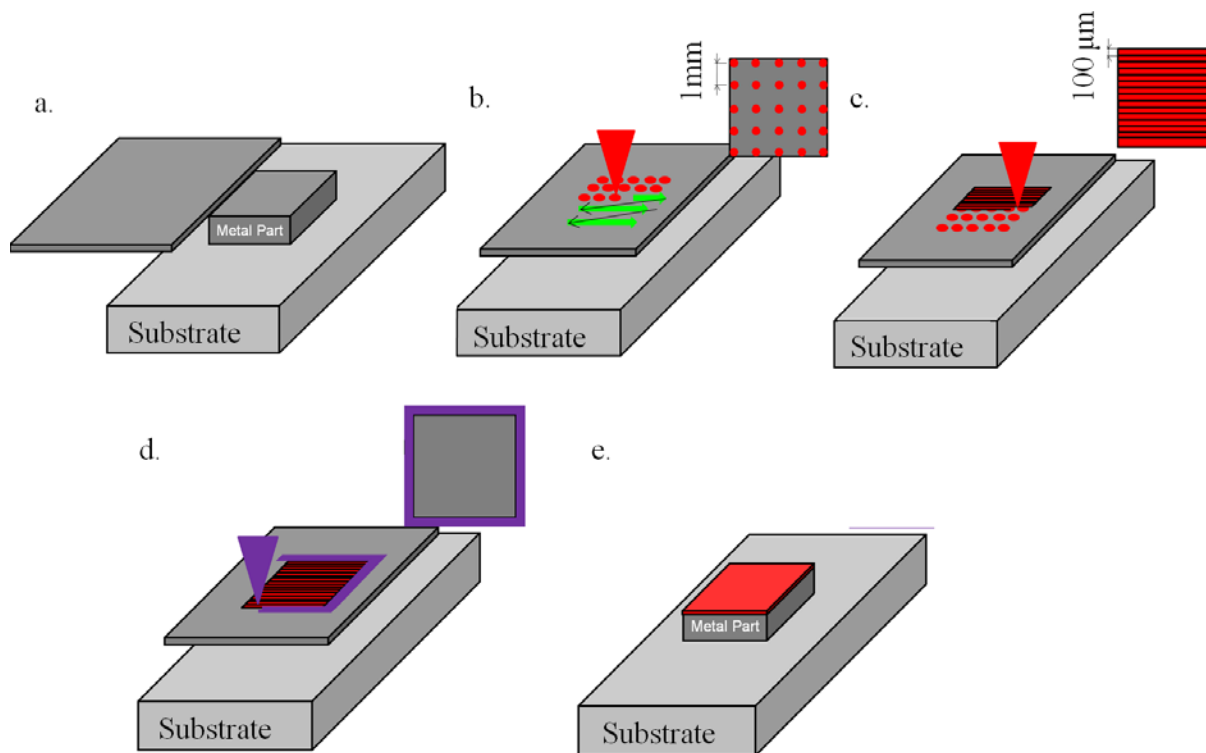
Schematic illustrations of five steps performed for each layer (a) foil feeding (b) spot weld (c) pattern weld (d) contour cutting (e) excess foil removing
